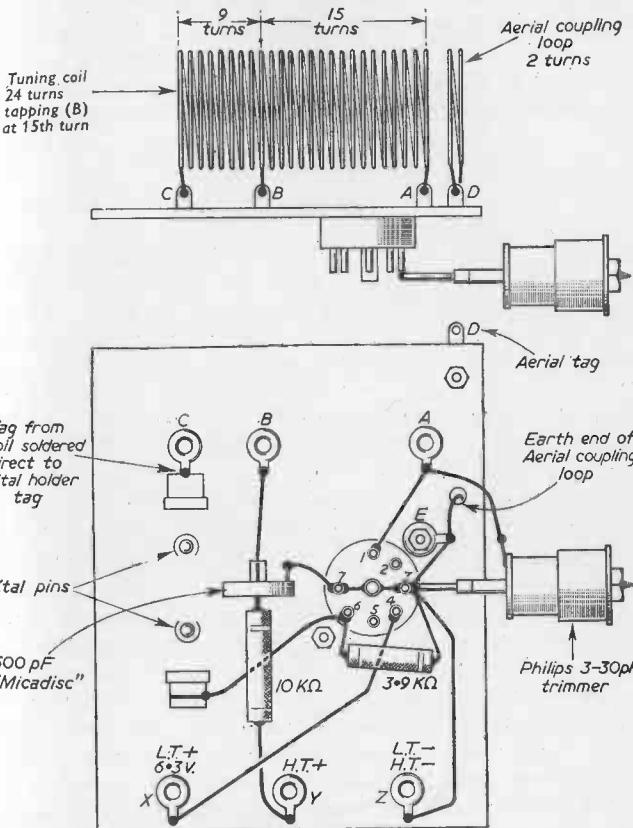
Wiring diagram and component layout for one-valve transmitter.
